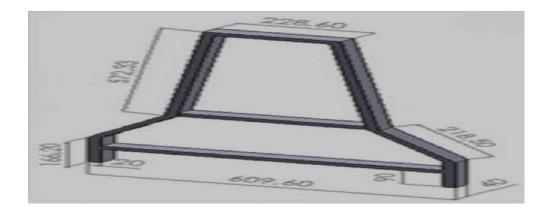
The connector element of hybrid barrier (Dimensions in mm).
